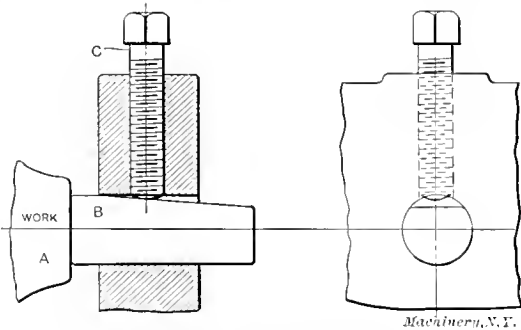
Adjustable Locating Point consisting of a Flatted Stud held in Place by Set-screws.
